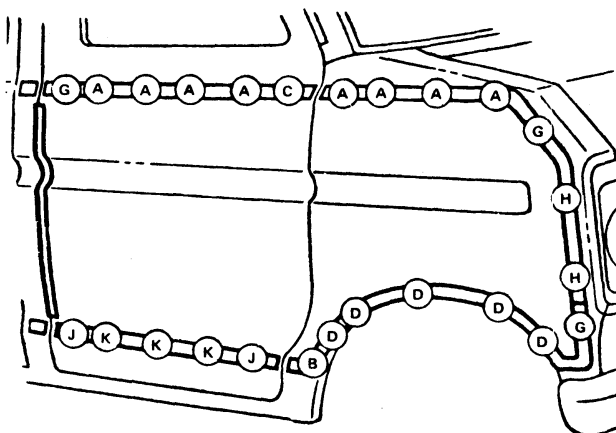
E-100—E-350 Exterior Side and Rear Mouldings
